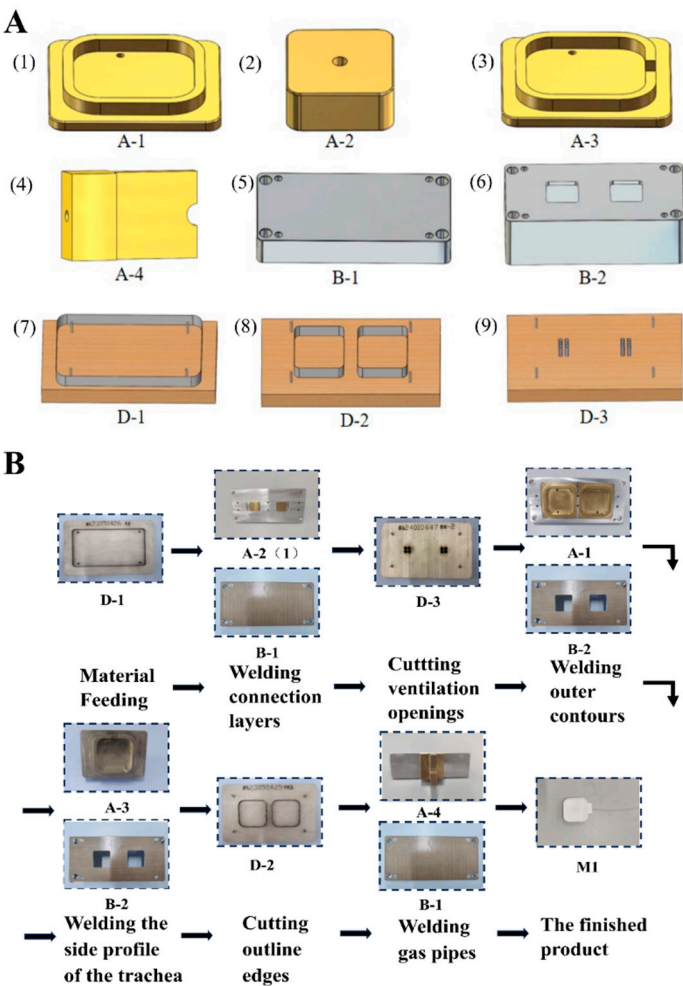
The Planning and Manufacturing Process of the Thin-Film Elongation Actuators. (A) The manufacturing molds for the thin-film elongation actuators: (1) The outer contour mold. (2) The intermediate connector mold. (3) The air tube side outer contour welding mold. (4) The air tube connection welding mold. (5)
